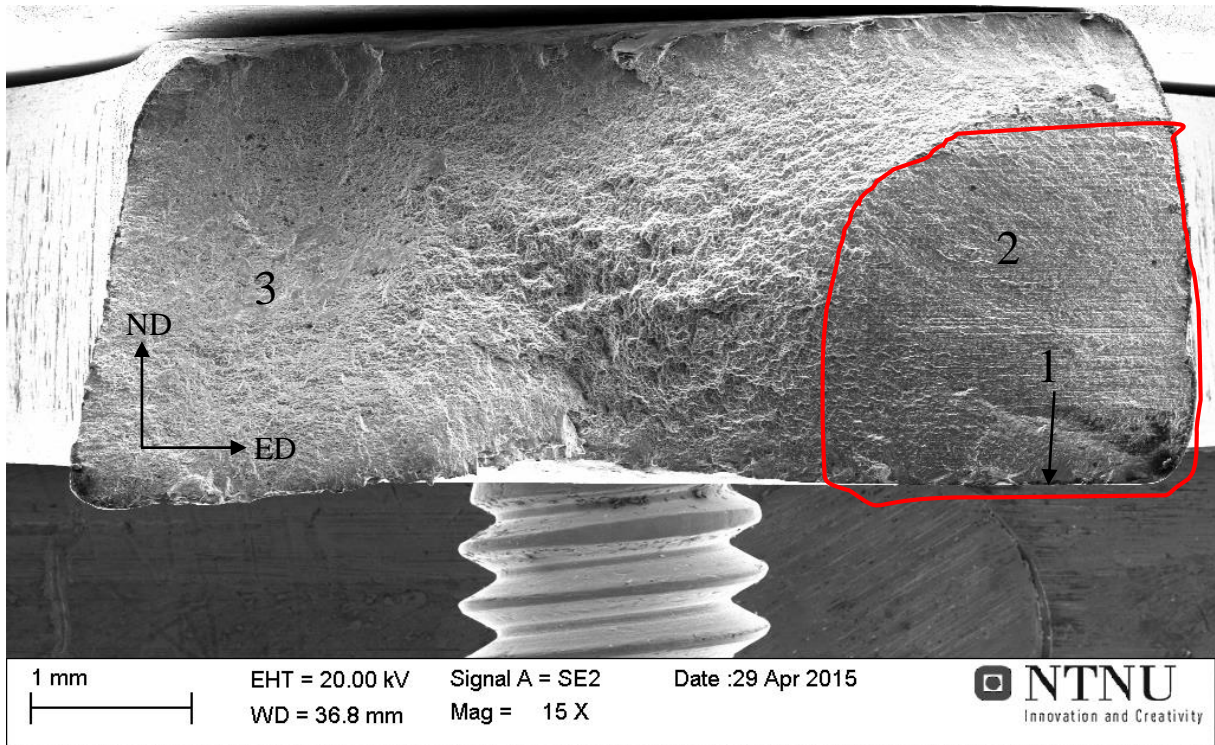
An overview of the fractured surface of AA6082 T5 with the shortest fatigue life, 15X magnification. The fatigue fractured area is enclosed by the red line.
